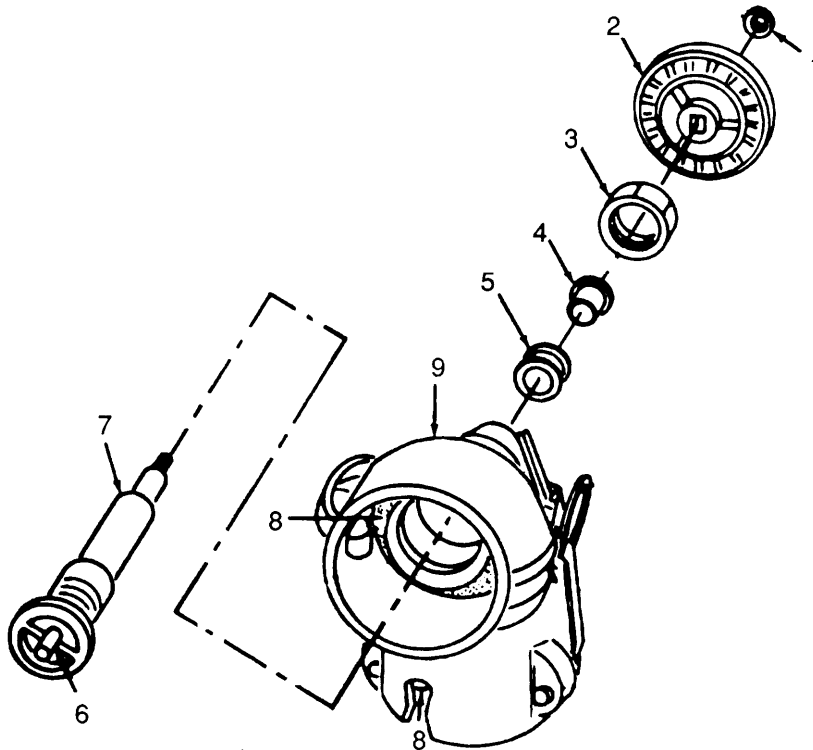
Elbow Coupler Valve, Disassembly/Reassembly.
